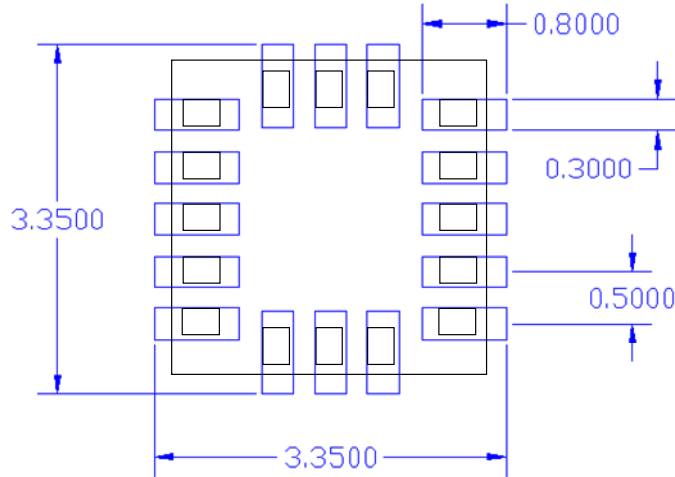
Recommended Printed Wiring Board Land Pattern (Dimensions Shown in Millimeters)
